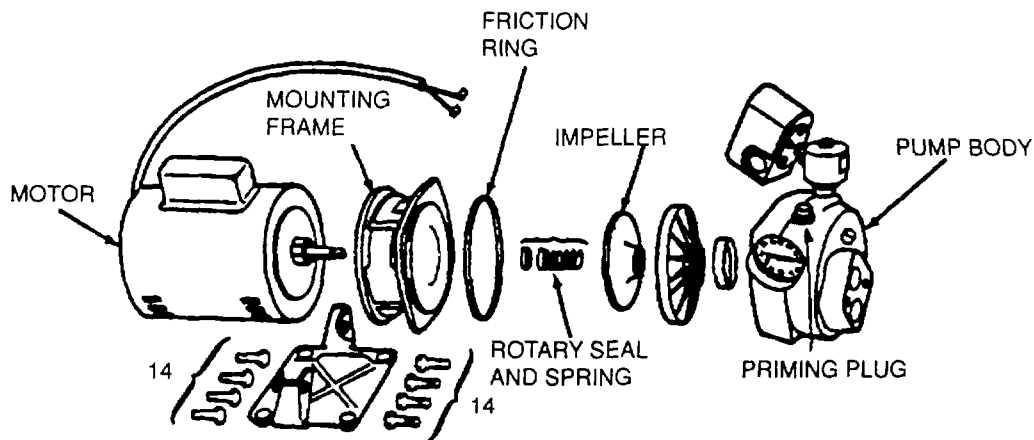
Pressure Set Pump Assembly, Exploded View
